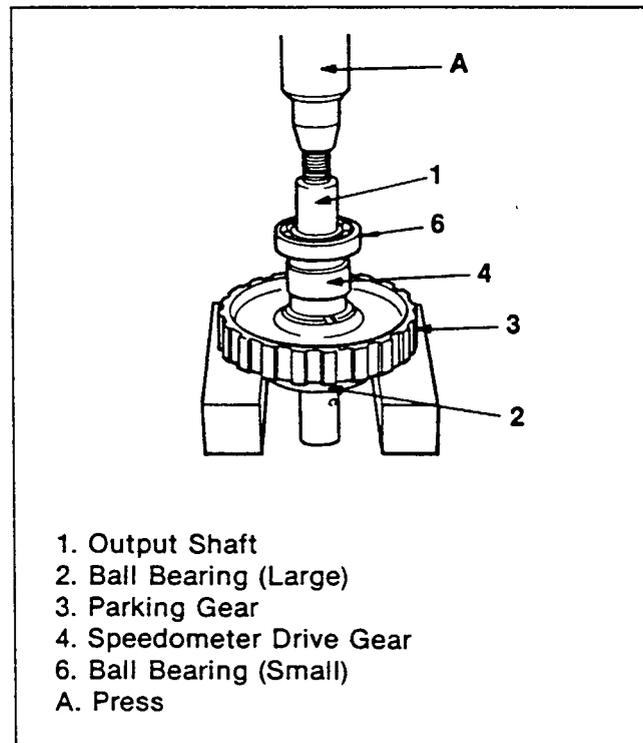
Ball Bearing (Small), Speedometer Drive Gear and Parking Gear Removal
